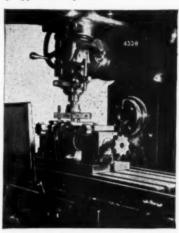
shows the fly cutting attachment to the milling machine head set up in operating position.
